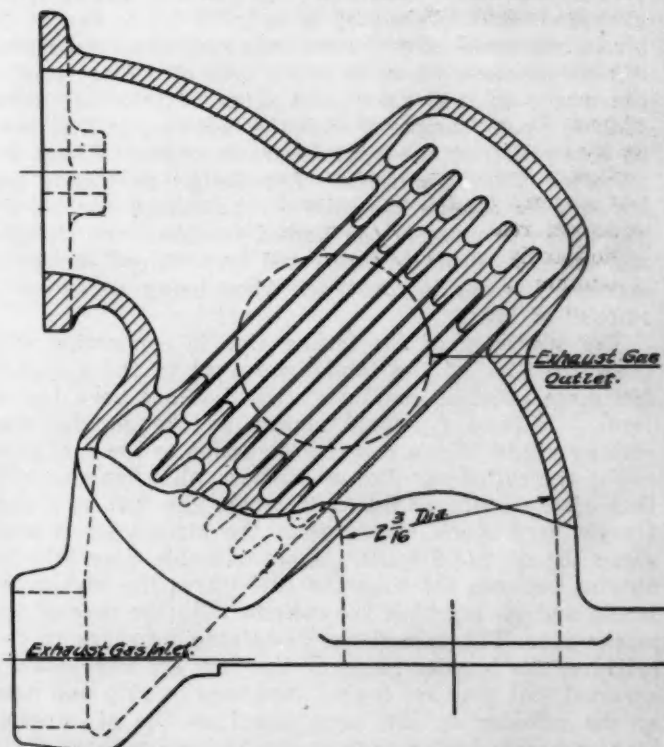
CROSS-SECTION OF INTAKE-PIPE FUEL VAPORIZER USED IN THE TESTS
